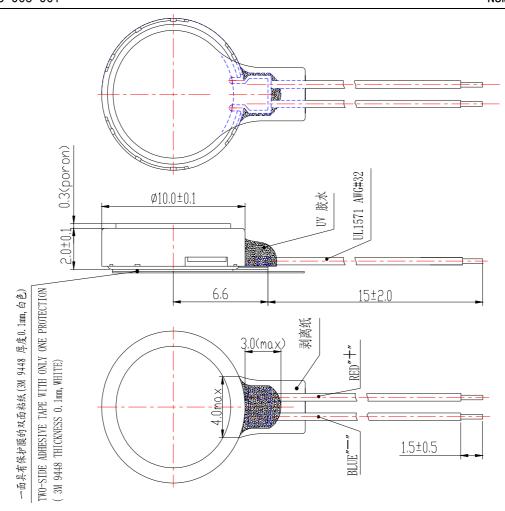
Motor Housing Configuration 图 1 电机外形结构图
